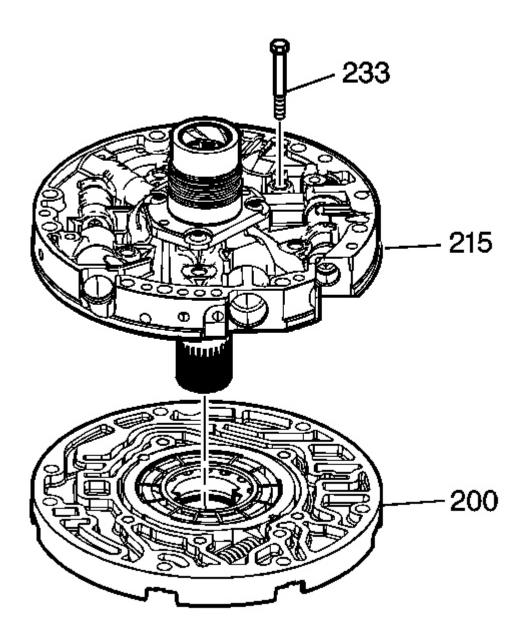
View Of Oil Pump Cover & Oil Pump Body Courtesy of GENERAL MOTORS CORP.
